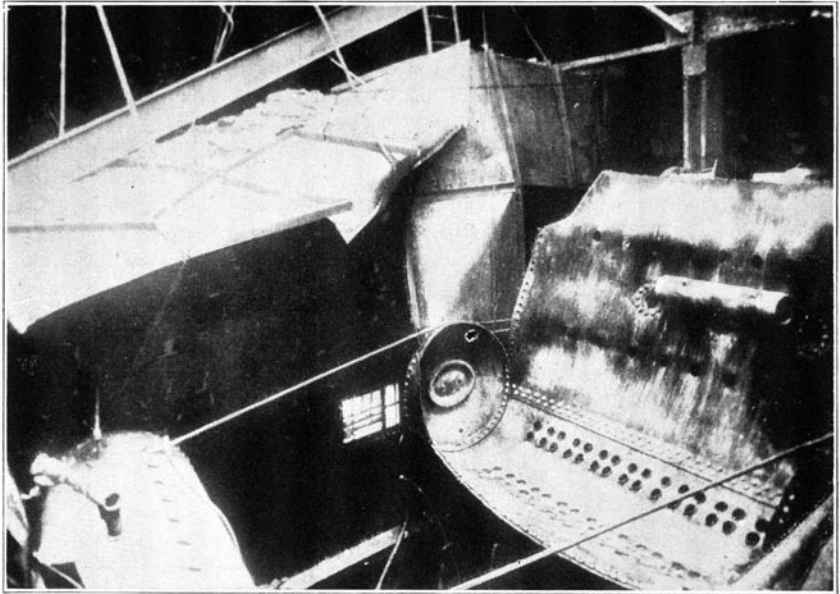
BOILER WHICH EXPLODED DUE TO EMBRITTLMENT
